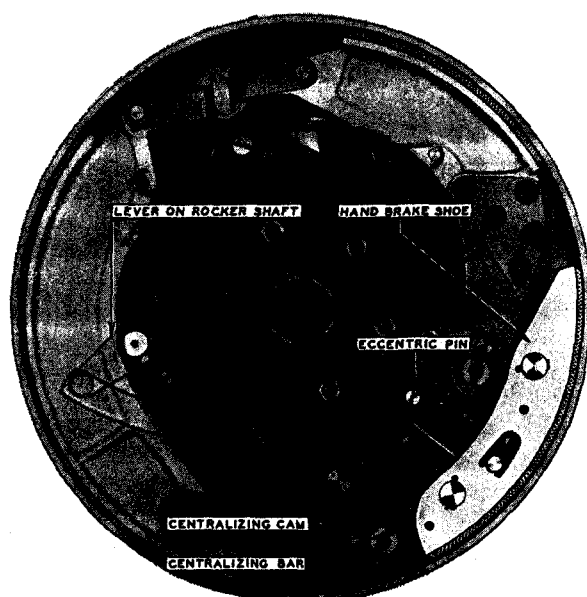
The hand brake mechanism in the Cadillac left rear wheel.
